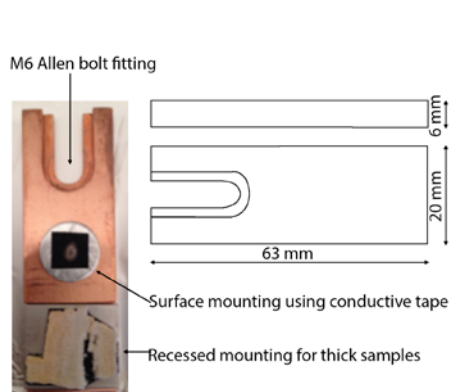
HeLIOS copper sample mount, pictured here with milled recess for larger samples.
